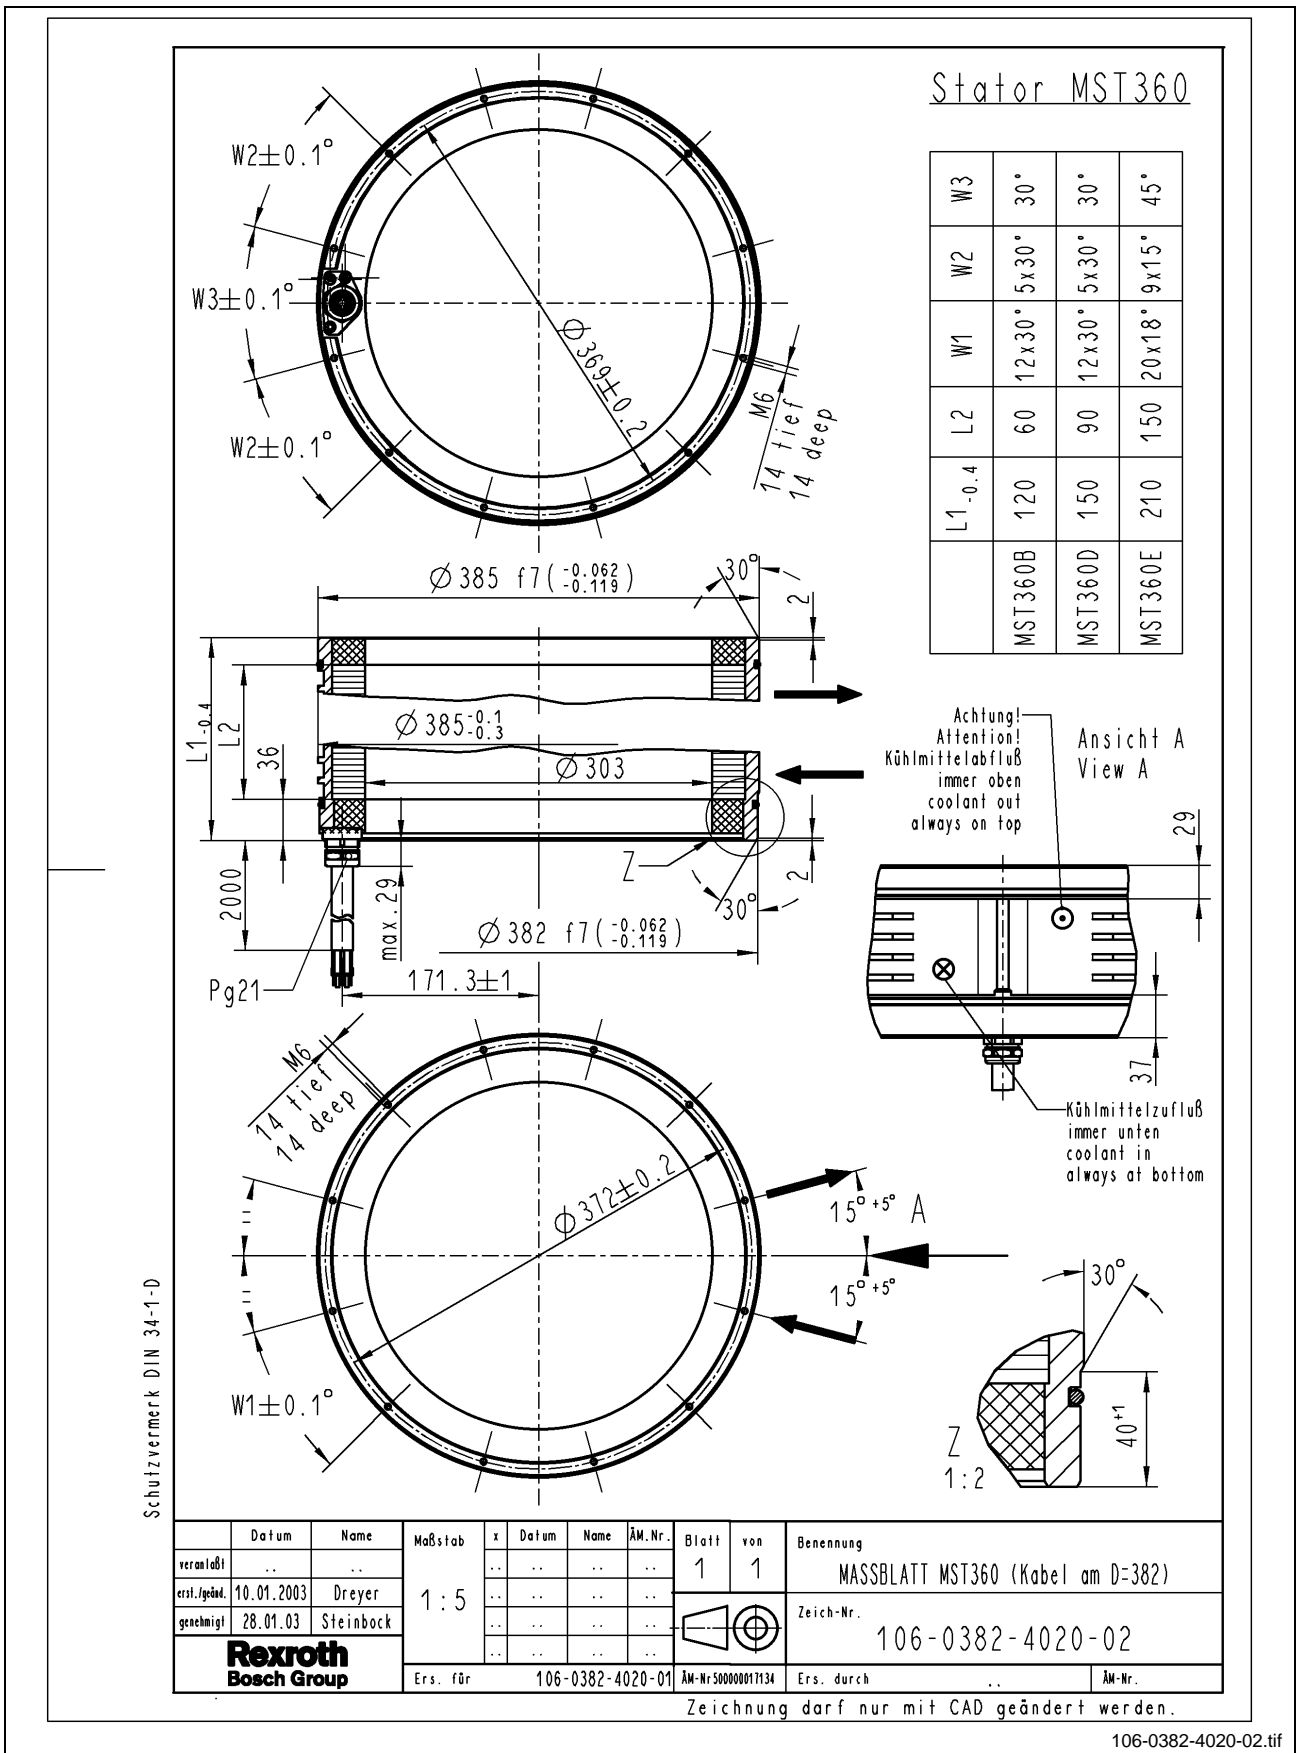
Dimension sheet Stator MST360, electrical connection "SN"
